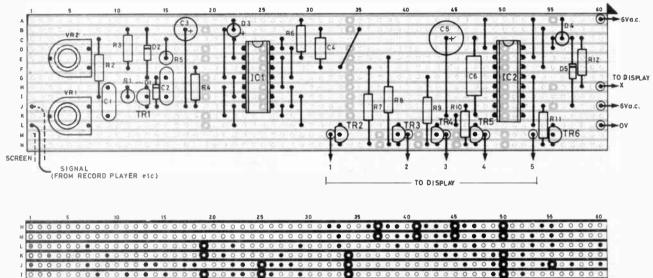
Component layout, underside showing breaks (44 off) in the copper strips and interwiring details. Use screened cable for the input signal lead.
